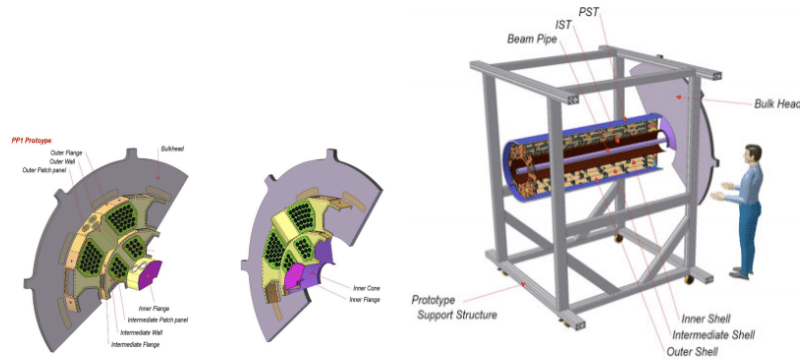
Left: design of the PP1 prototype. Right: design of the endcap prototype.
